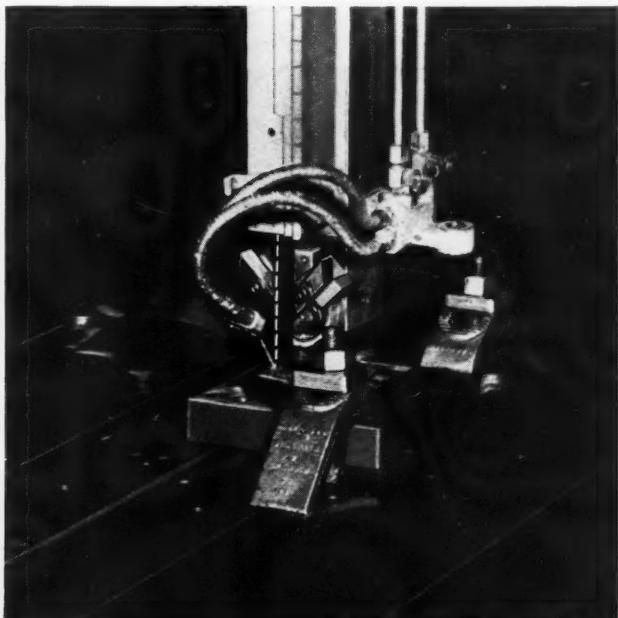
Removing the broken section of a hardened tool-steel die by the line-grinding process in a Contour-matic band saw
